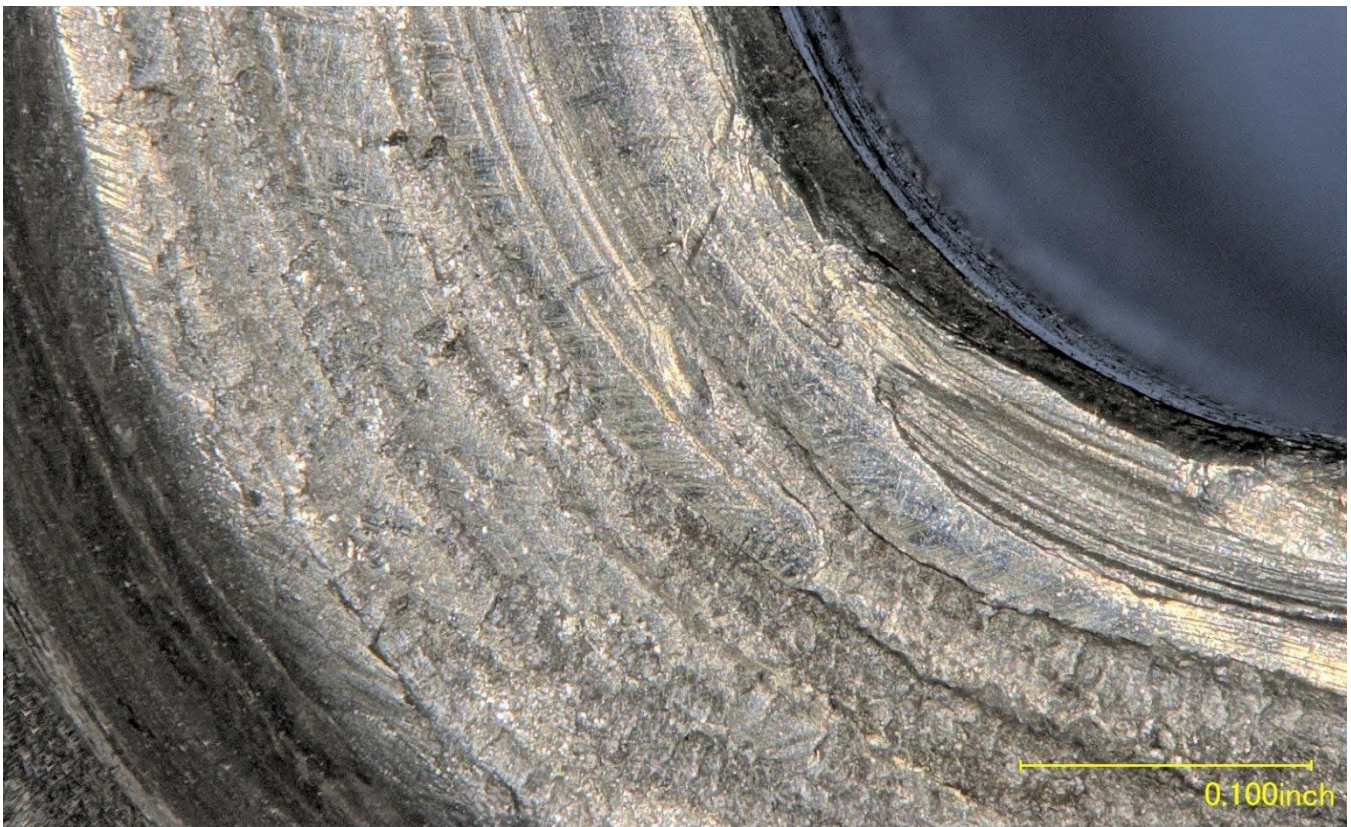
Closer view of Figure 10a, showing gouging and smearing on the rod surface.
